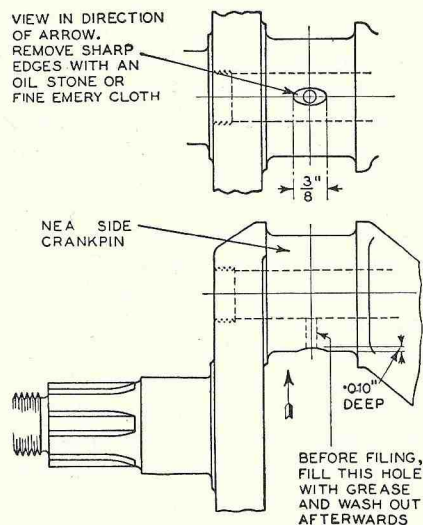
ILLUSTRATION SHOWS POSITION AND DIMENSIONS OF MODIFICATIONS TO OIL-FEED HOLES ON THE CRANKPIN JOURNALS OF 1948-49 MODELS.
